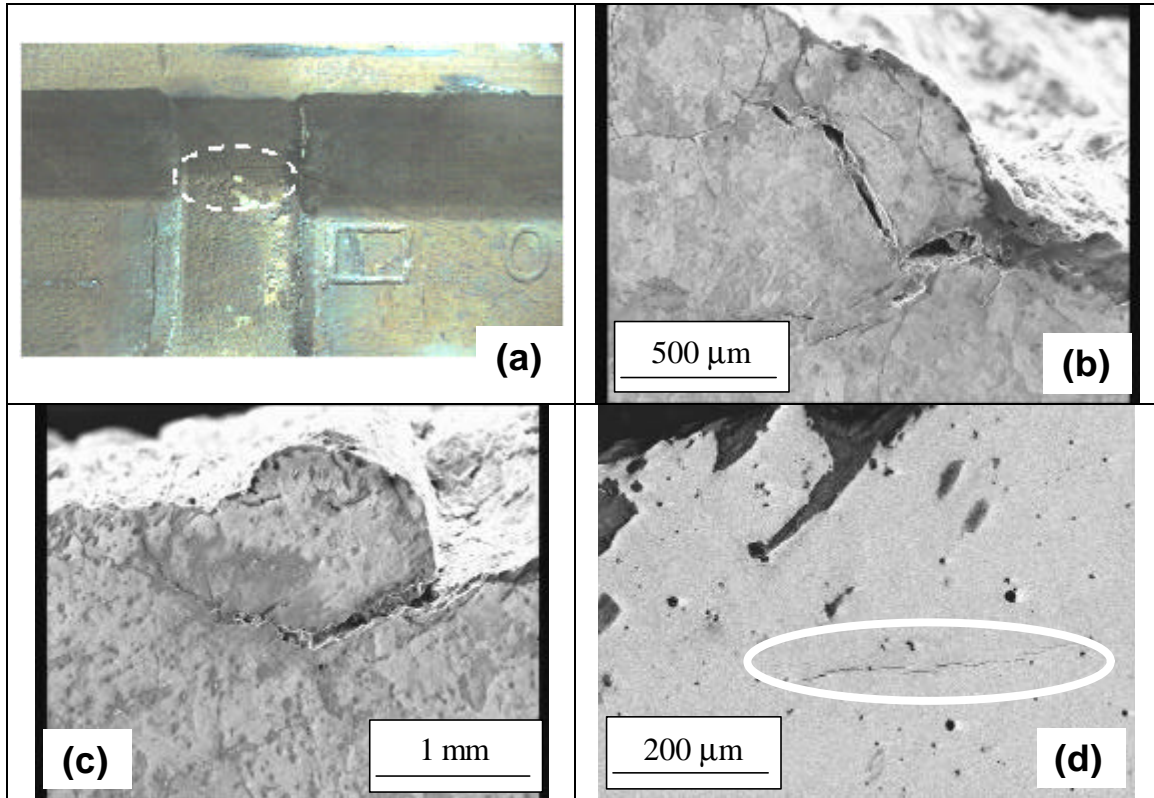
SEM analyses of fracture at the welded joint: a) examined region; b) and c) mode II damage on the fracture surface; d) a secondary crack showing a stepwise pattern.
